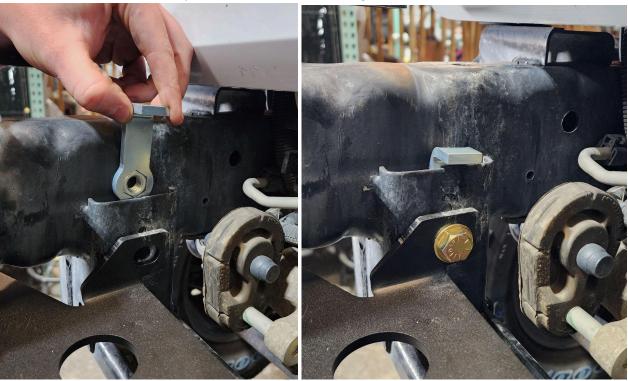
Use the provided 3/8" bolts threaded into nut stick "E" for the rear winch tray side mounts.
